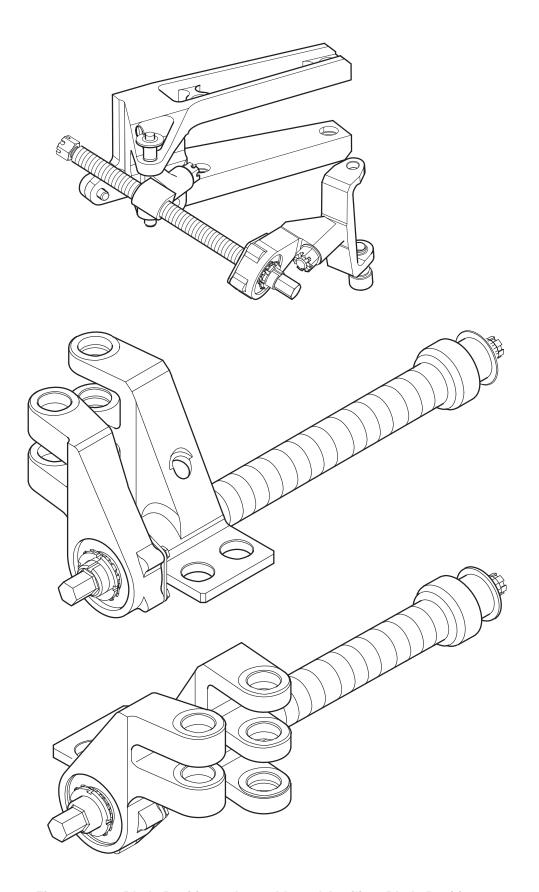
Blade Positioner Assembly and Auxiliary Blade Positioners
